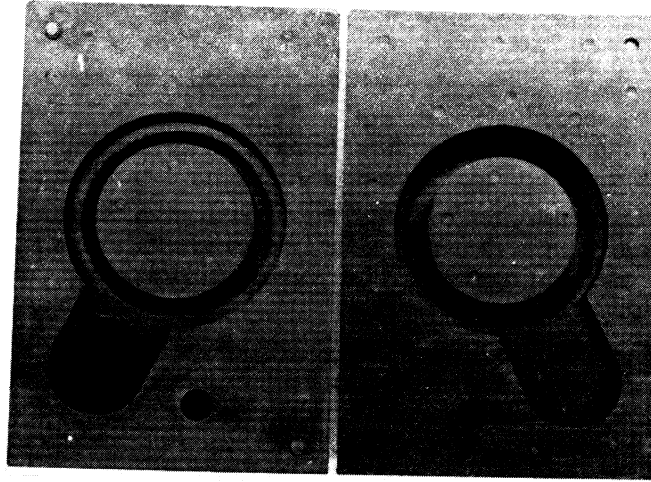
Shell mold for front follower, Part No. 7360356.
